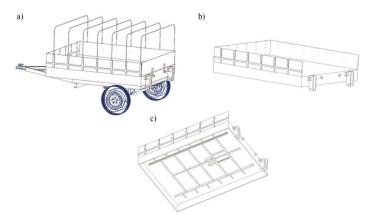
a) Trailer, b) front view of loading bed, c) bottom view of loading bed.
